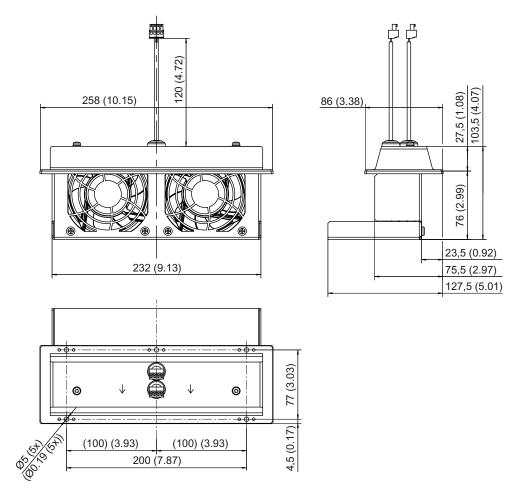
Dimension drawing of the external fan unit, all dimensions in mm and (inches)
